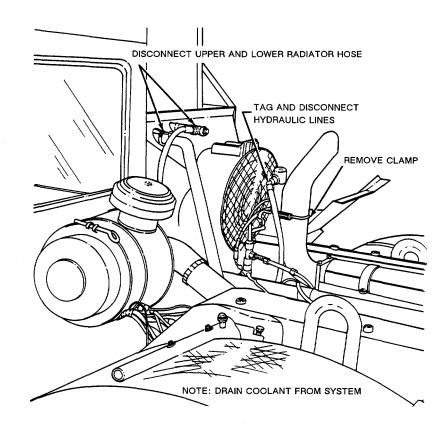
Carrier radiator, removal and installation (Model 2385) (Sheet 1 of 2).
